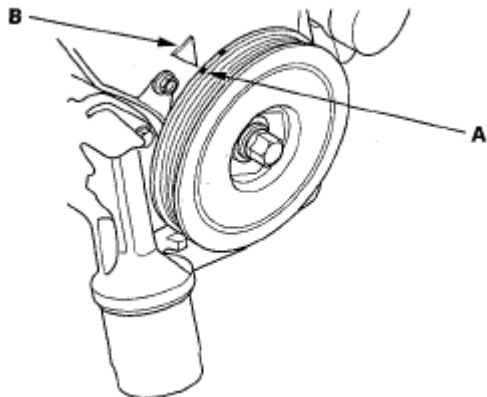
Identifying White Mark On Crankshaft Pulley Lines
